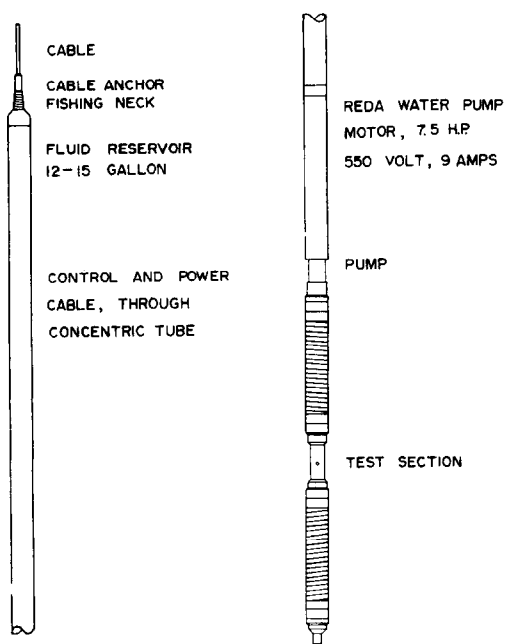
Tool No. 3 - Hydraulic gear pump and reservoir.
